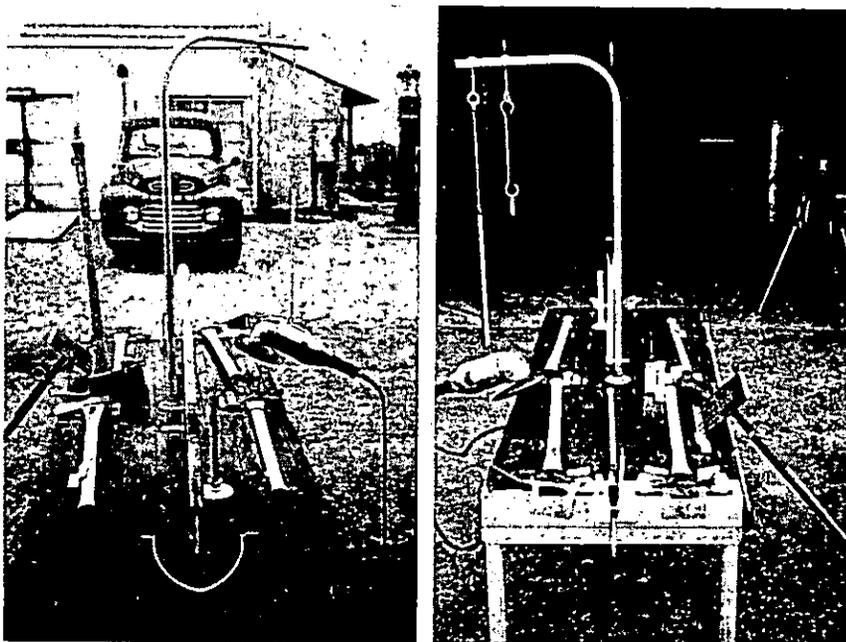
Tool grinding table: *Left*, Tools in position for grinding; *Right*, jigs for holding tools from which handles are to be removed.
